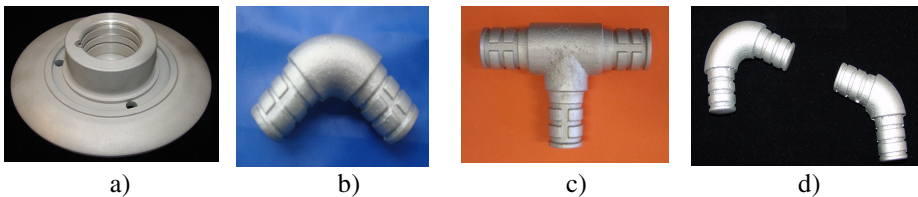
a) Base machined b) Elbow 90° c) Tee d) Elbow 60° and Elbow 120°.
